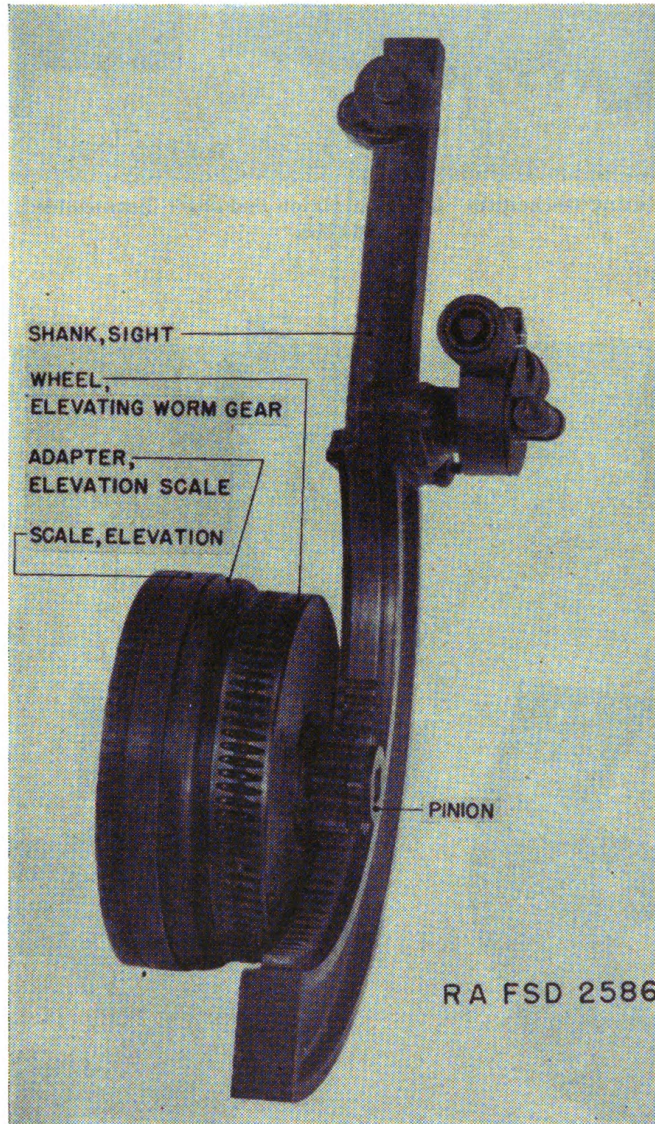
Sight shank and elevating gear with adapter and scale assembled, quadrant sight, M1918.
